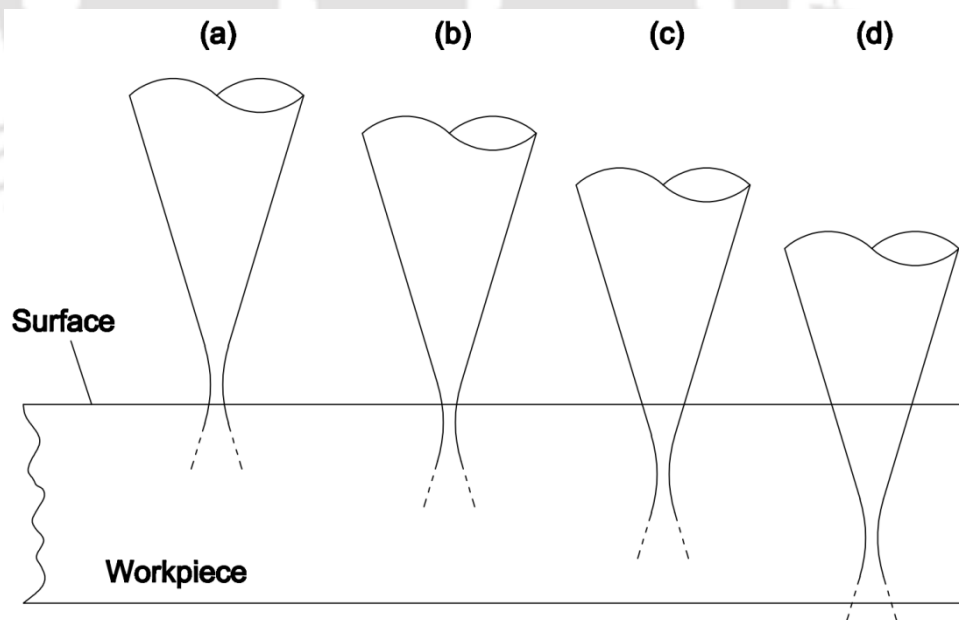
Different defocusing positions in laser beam welding process
